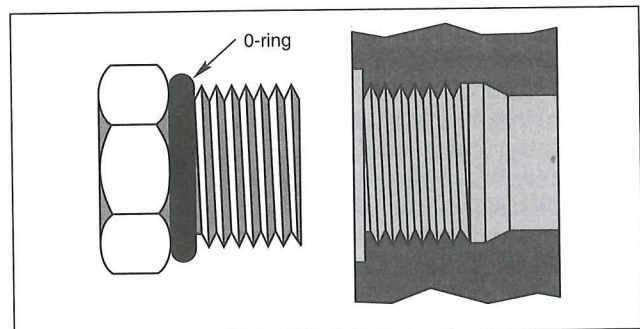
The straight-thread port seals with an O-ring between threads and wrench flats.
